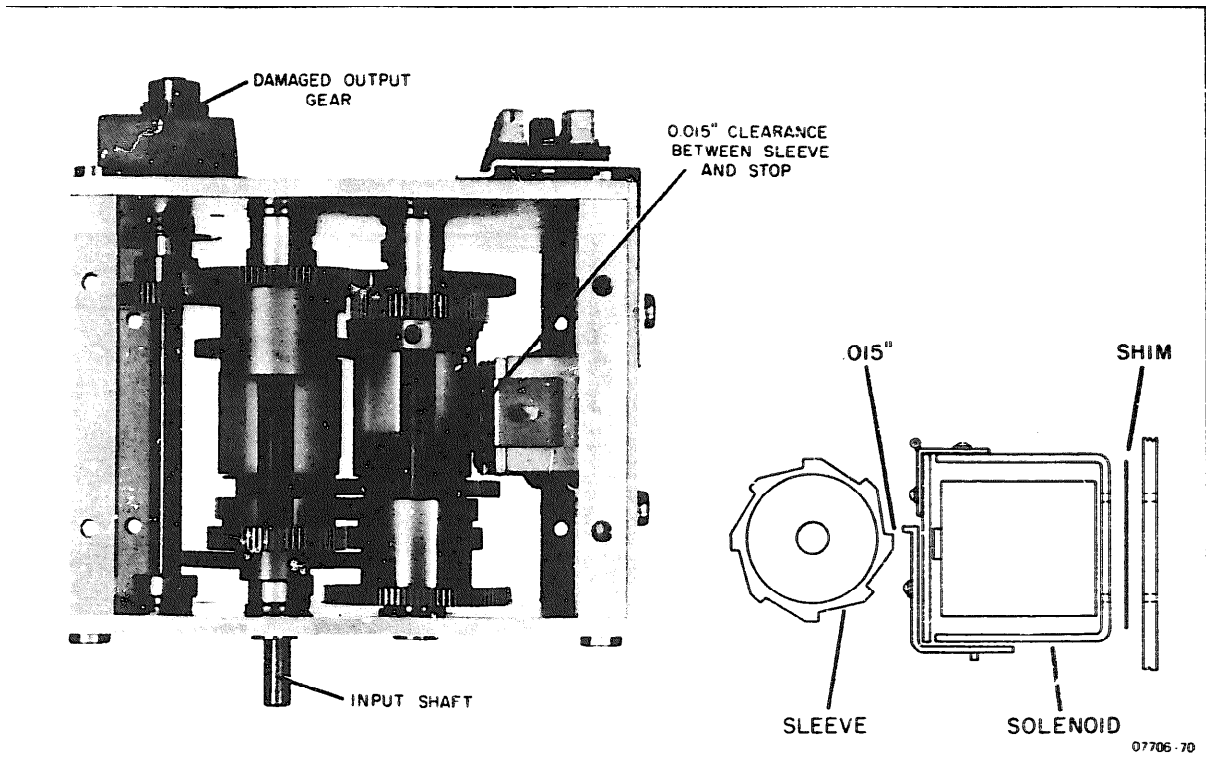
Gear Box Assembled, Clearance Between Solenoid And Clutch Sleeve Indicated
